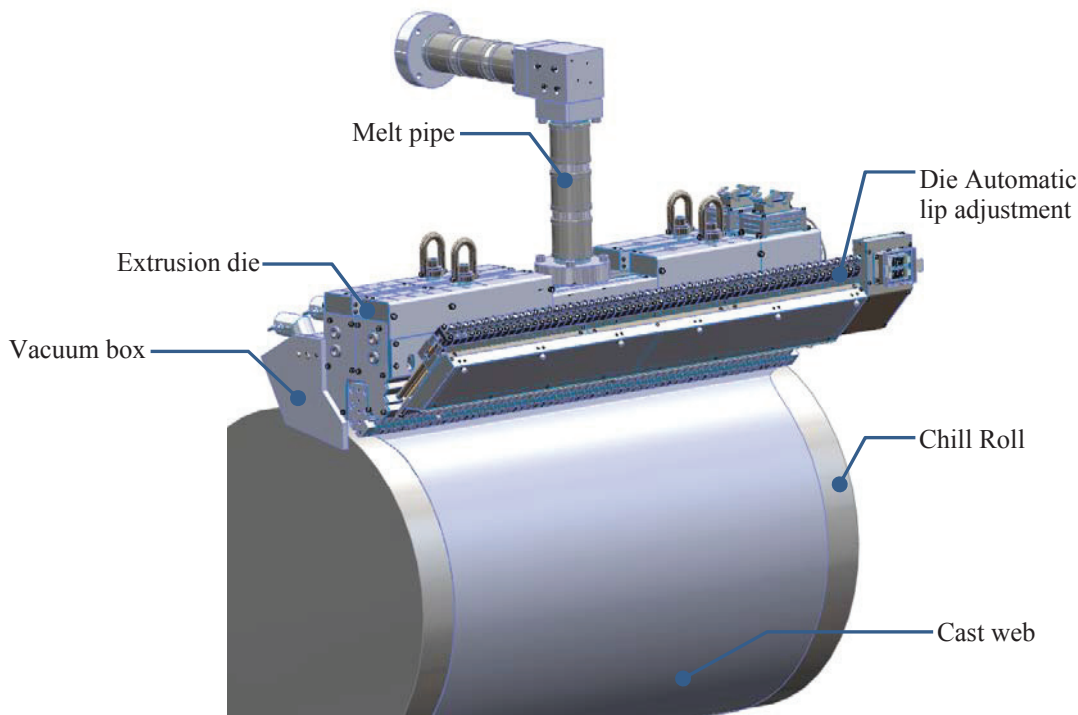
Typical monolayer cast film layout (Note: extruder is not shown)
